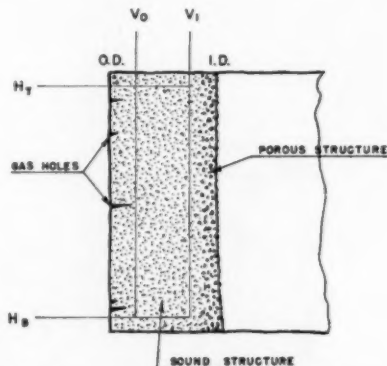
TYPICAL CROSS SECTION OF CENTRIFUGAL CASTING SHOWING APPROXIMATELY 50 PER CENT WASTE OF BRONZE DUE TO GAS HOLES AND POROSITY
